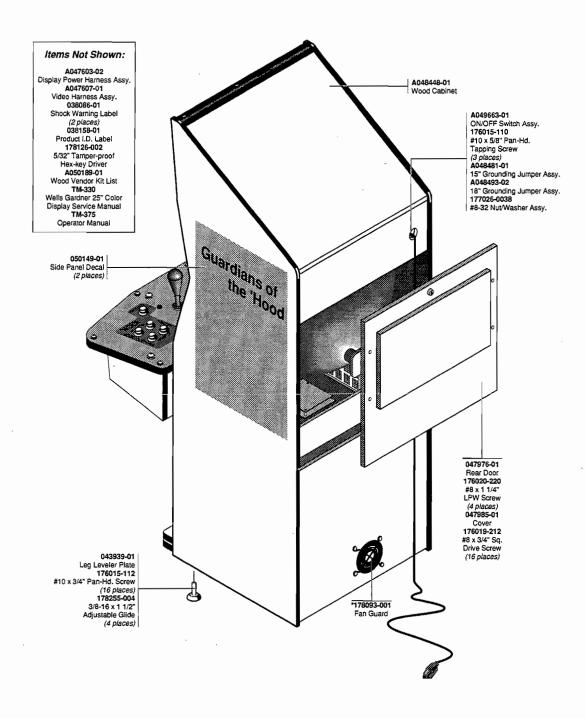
Cabinet-Mounted Assemblies, Front View
